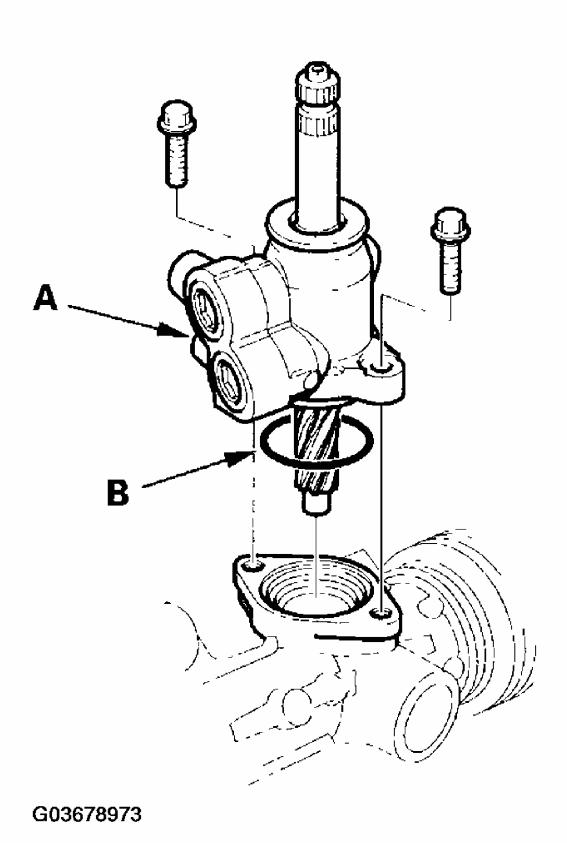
Removing Valve Body Unit From Steering Gearbox
